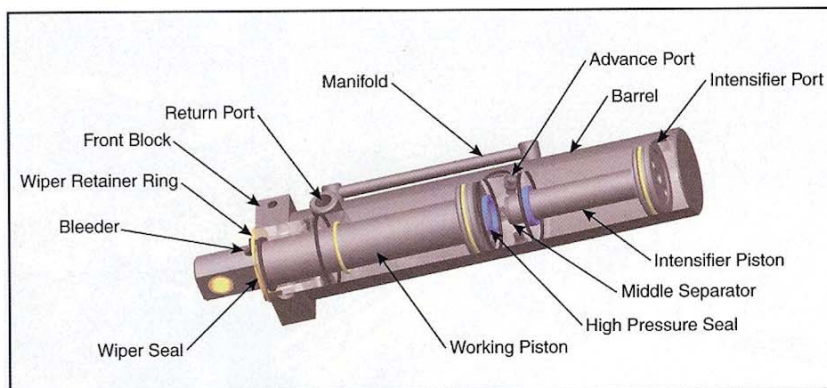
An air-over-oil intensifier cylinder is shown. (Photo courtesy of CenterLine Windsor.)
